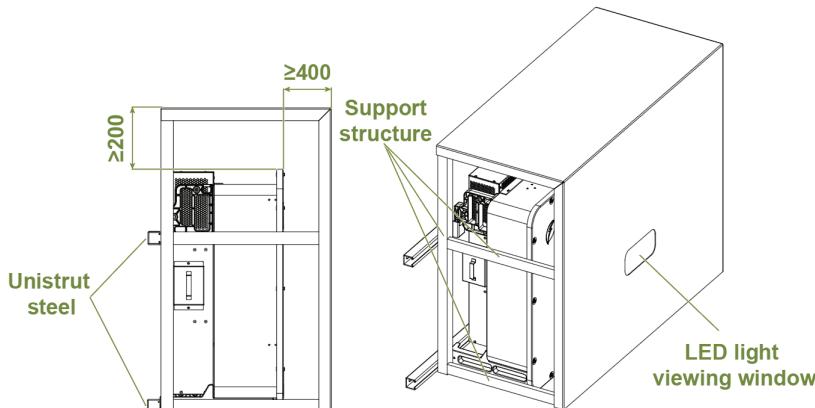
Sunshade Installation Recommendations (Unit: mm)
